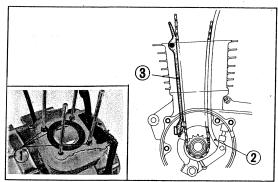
① Dowel pins ② Cam chain tensioner ③ Cam chain guide
